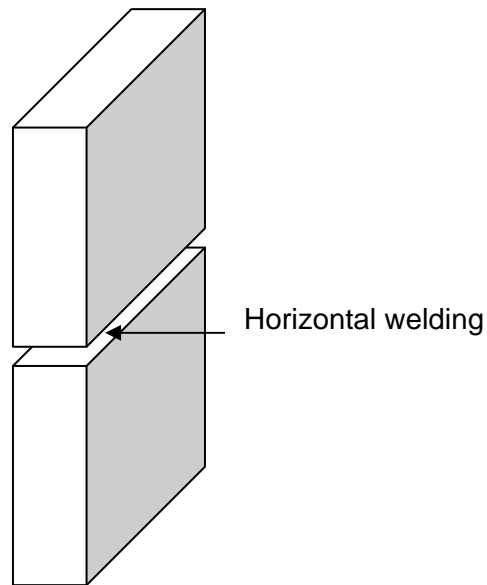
Scheme of placement of components to be welded for horizontal welding
